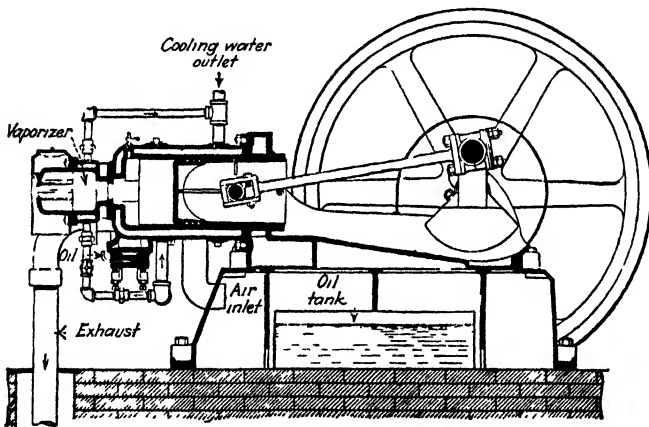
Cross section of Hornsby-Akroyd oil engine.
